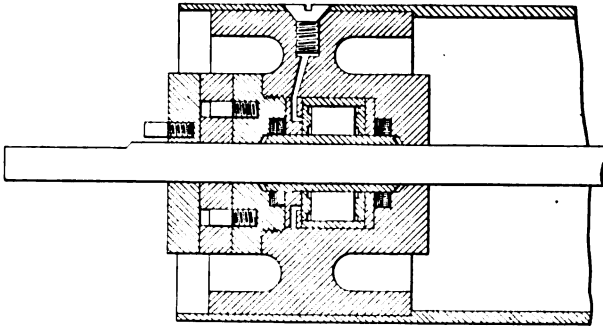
NEW BEARING HOUSING AS FITTED IN OLD TUBE BY RAILWAY COMPANY
